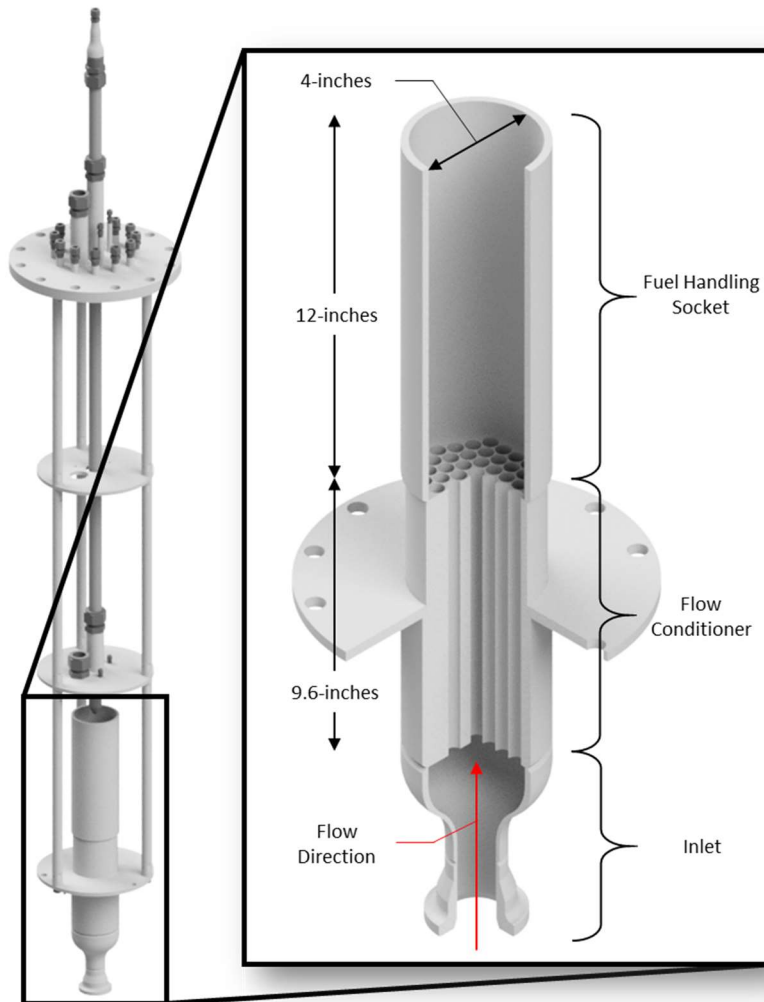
Detailed isometric view of the Full-Scaled Test Assembly which includes a Grayloc connector, inlet header, flow condition, fuel handling socket, and base-plate. Dimensions of the socket denoted here and listed in Table 1 are nominal and were chosen to capture the essence of a prototypical SFR fuel handling socket.
